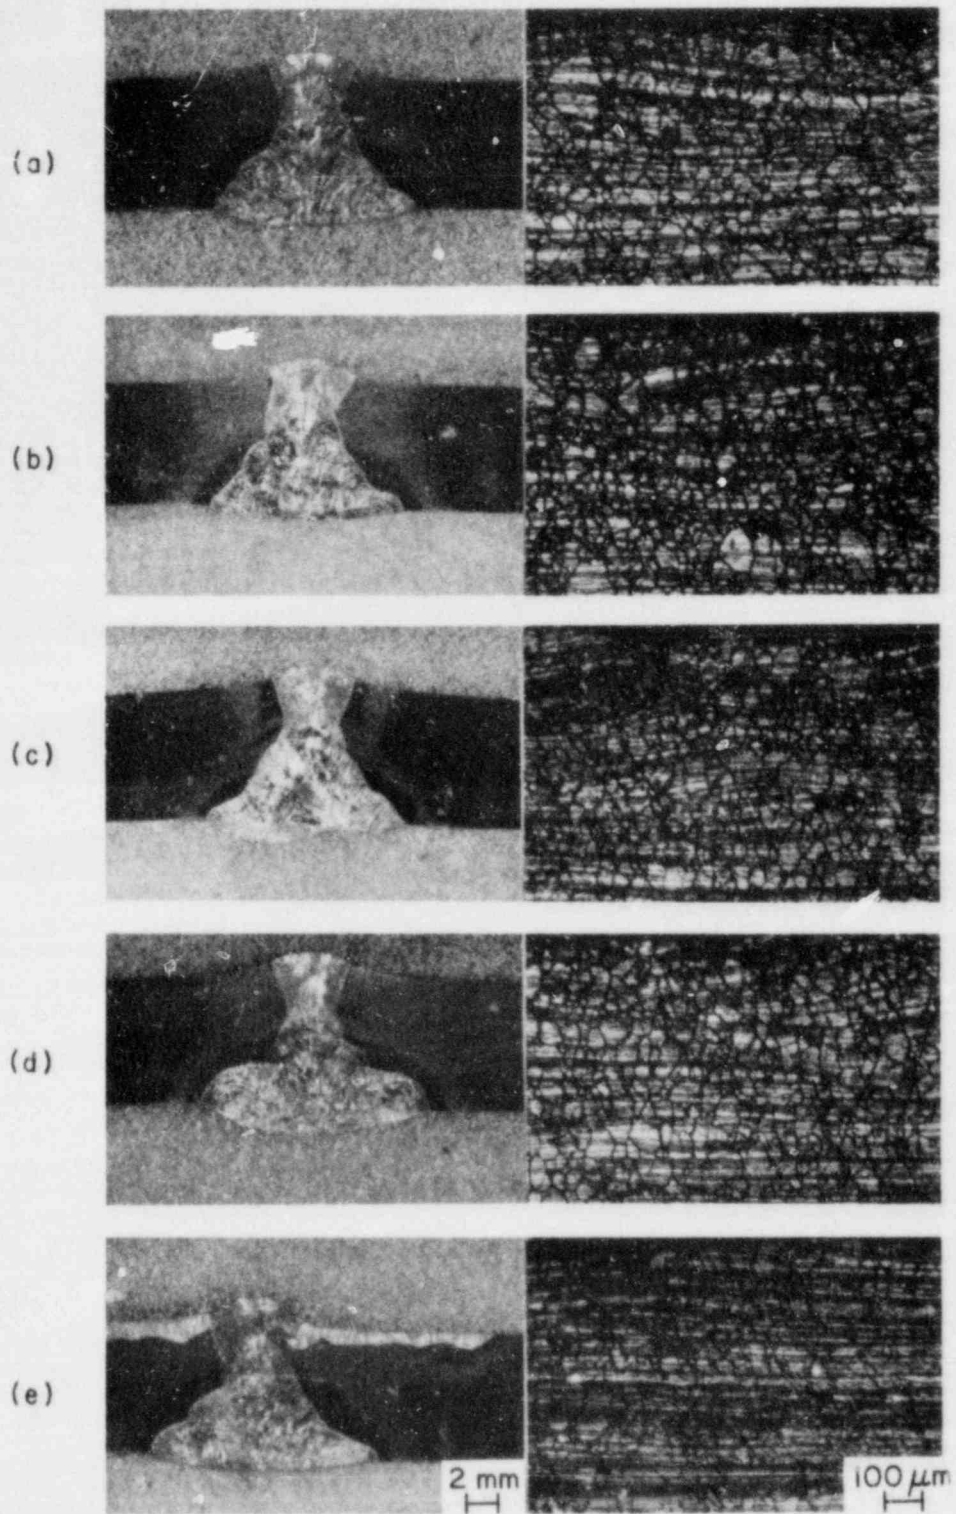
ASTM A262-A Test Results for 4-in.-diam Type 304 SS Pipe Weldments: (a) Conventional Weld, (b) IHSI, (c) HSW, (d) LPHSW, and (e) CRC.
